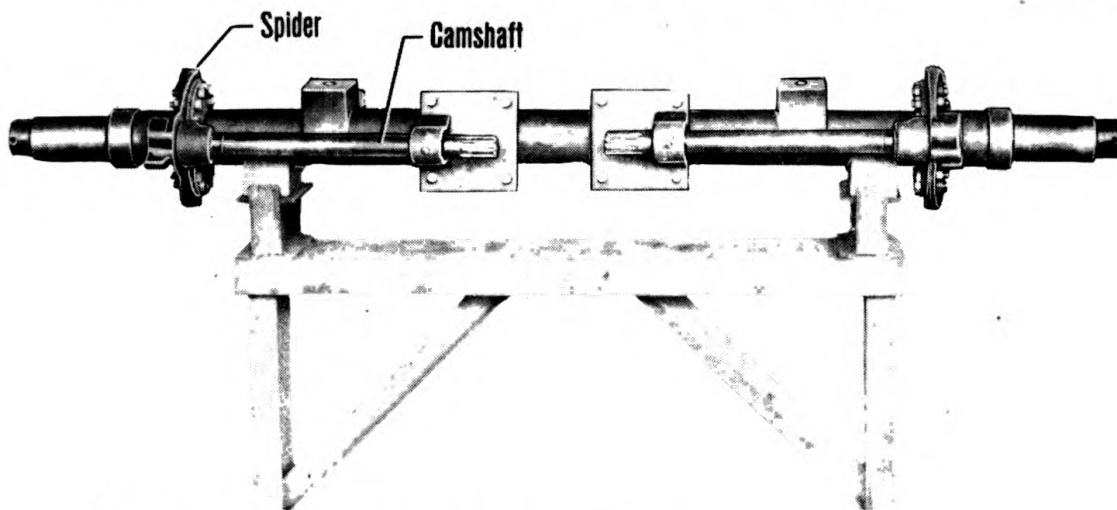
Front Axle, with Brake Chambers and Slack Adjusters Removed
